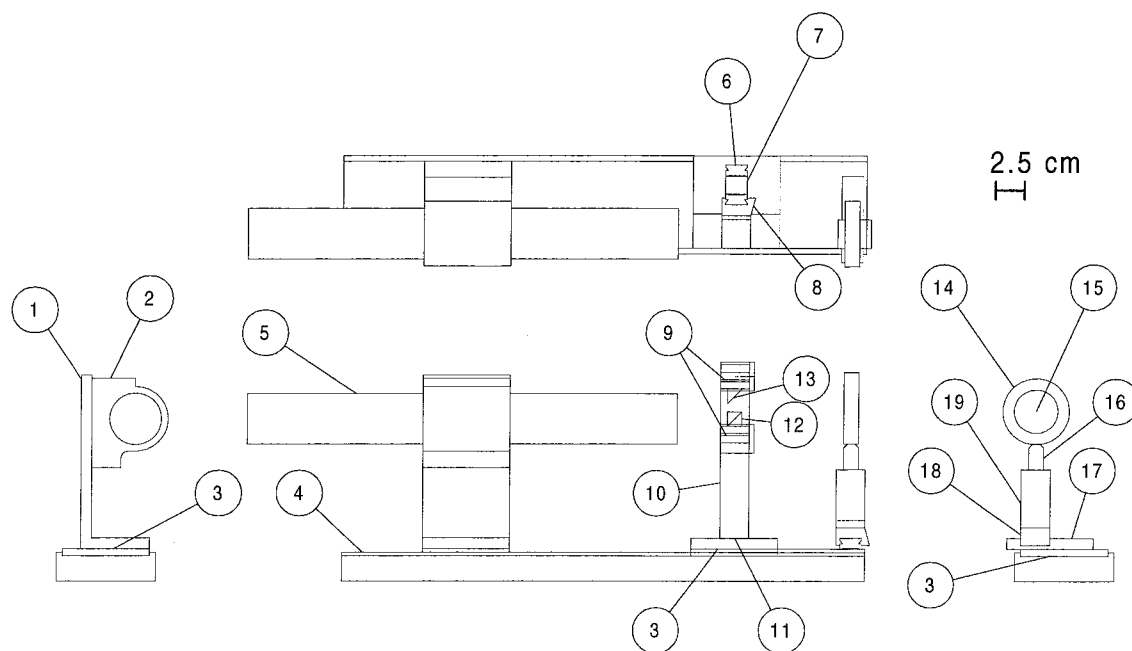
PDA transmitter assembly diagram. See Table 8.2 for parts identification.
